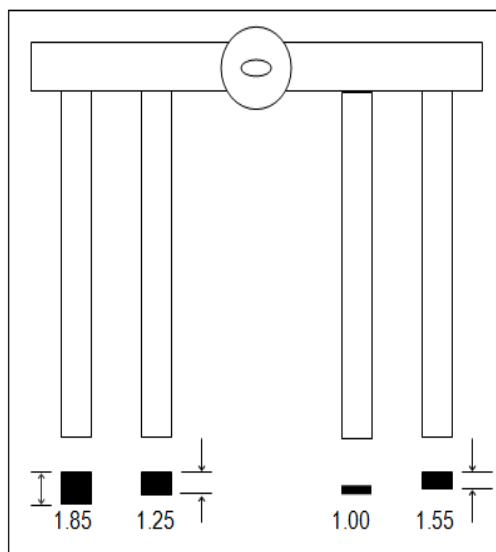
Strip fluidity test mould. All dimensions are in mm.
